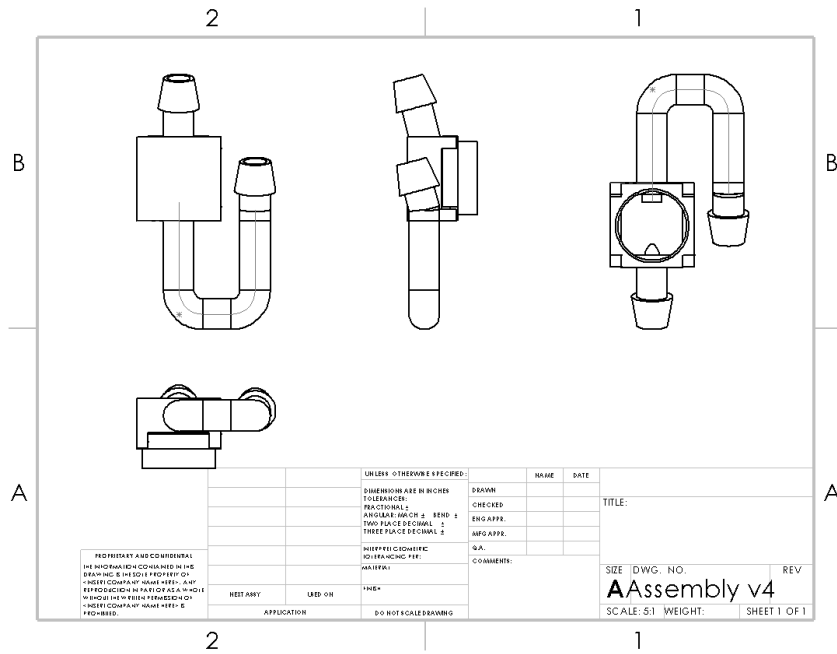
Schematic of Flat Sheet Membrane Rodent Model Assembly
